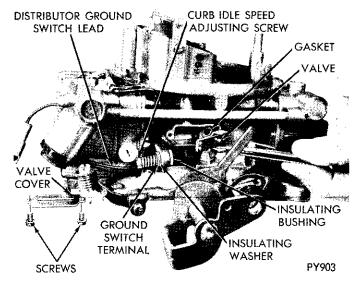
Removing or Installing Hot Idle Compensator Valve
